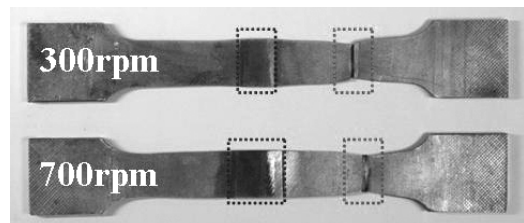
Fractured transverse tensile specimen of the friction stir welded SK5 steel.
